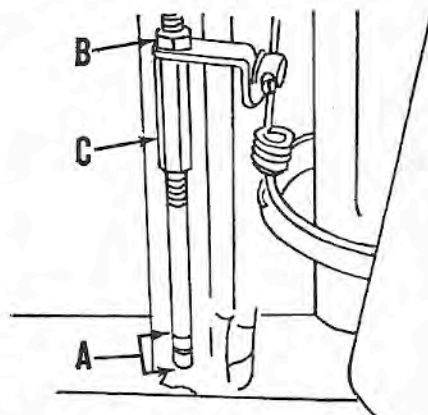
To adjust the shift linkage, scribe a line on intermediate shift rod in "Forward," "Neutral" and "Reverse" positions (A). Equalize by loosening locknut (B) and threading connecting turnbuckle (C) out or in.
